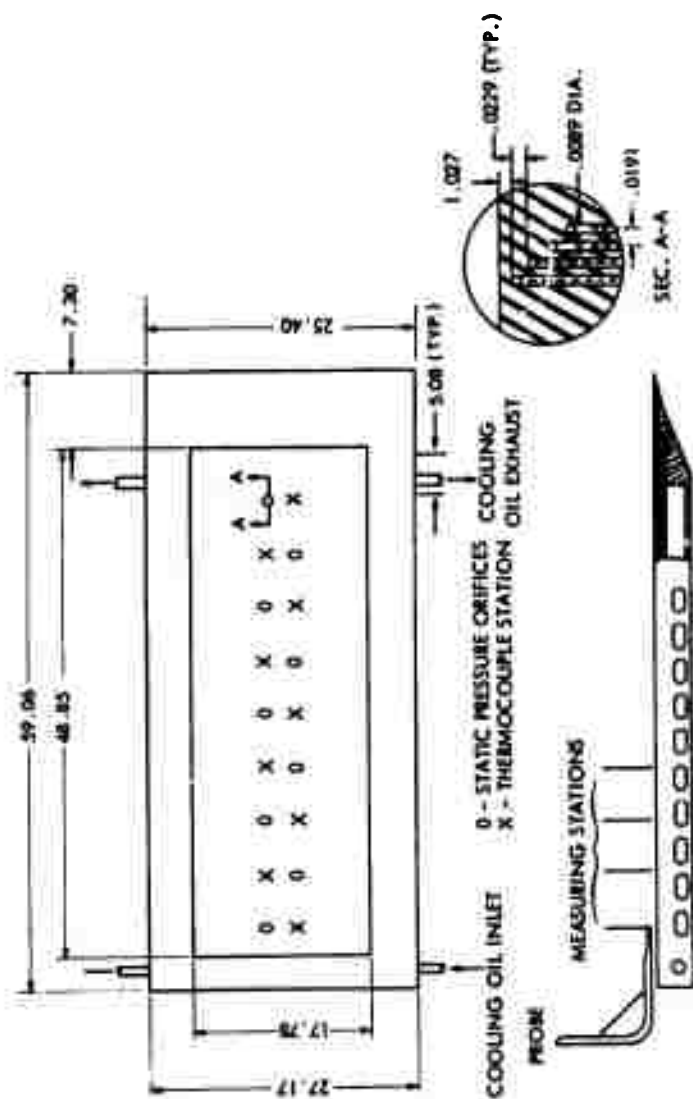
SKETCH OF MODEL ( ALL DIMENSIONS IN CM )
